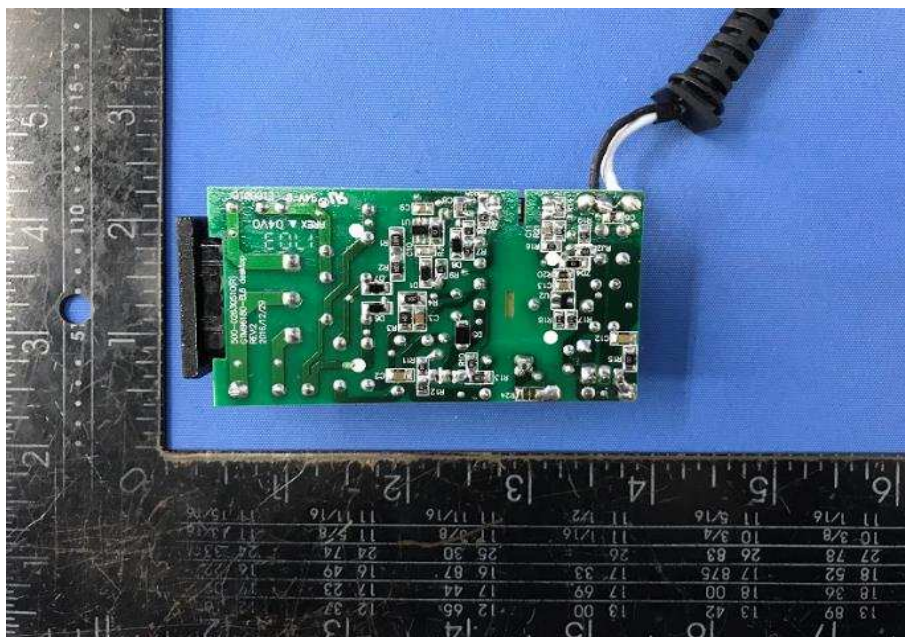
PCB view for GTM96180 series (Class I) with R22, R23 and without R24
